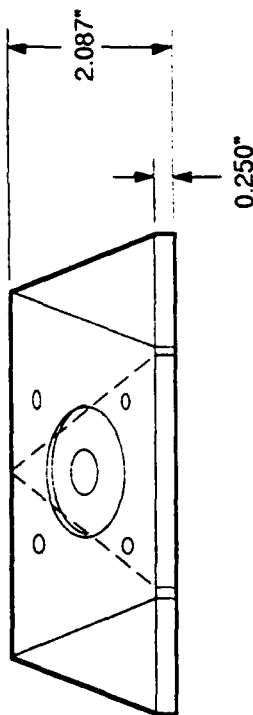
Node/motor interface engineering drawing, sheet #1.
